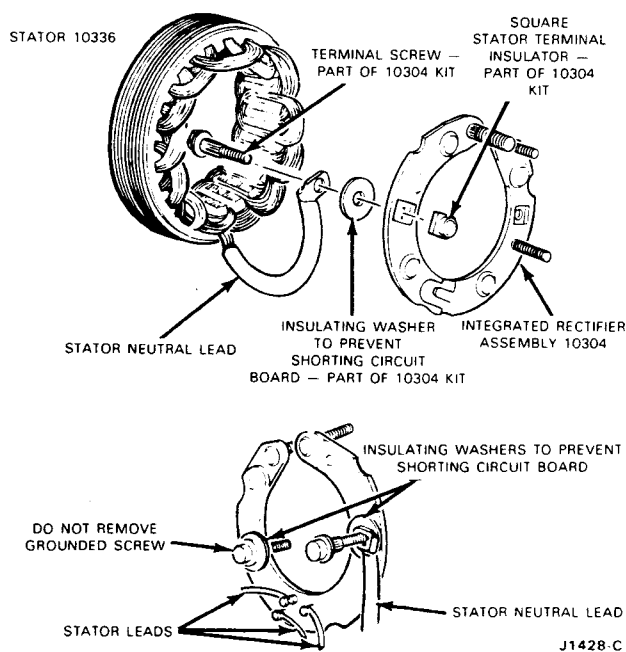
Stator Terminal Installation — Integral Rectifier Circuit Board
